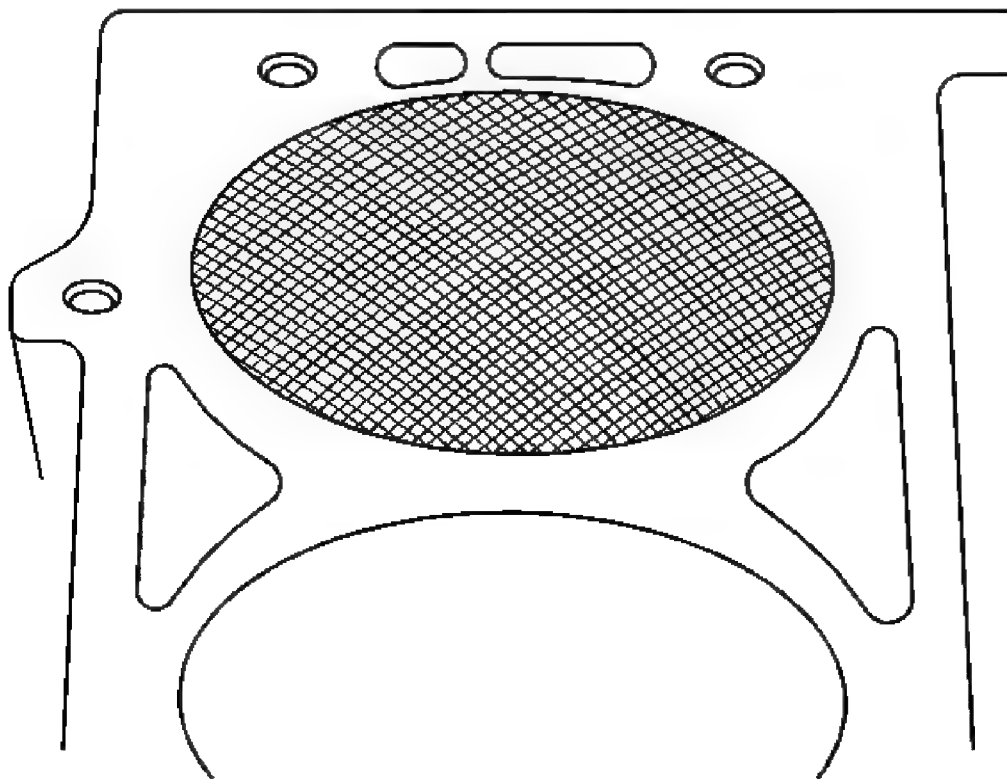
Identifying Cylinder Bore Cross Hatch Pattern
